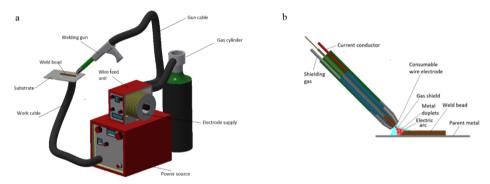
(a) Equipment necessary to carry out the deposition process; (b) Sketch of deposition process based on GMAW technique.
